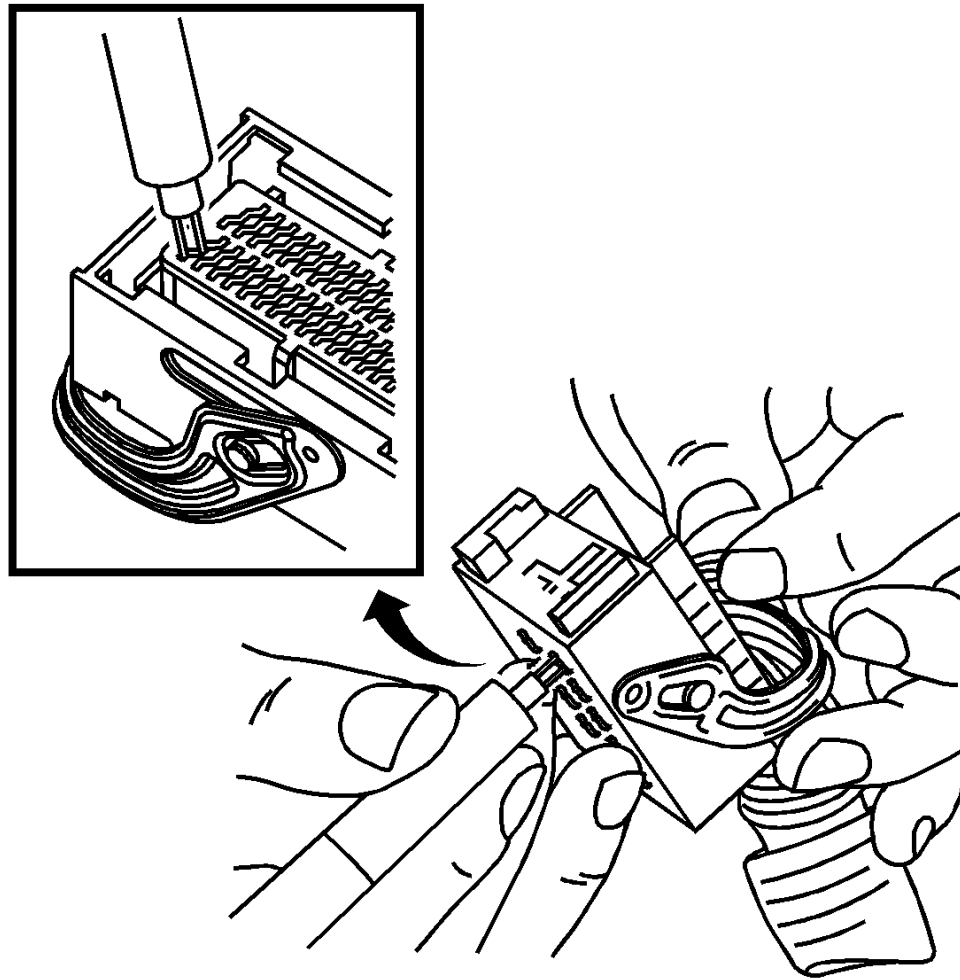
View Of J 38125-560 Being Inserted Into Triangular Cavities
